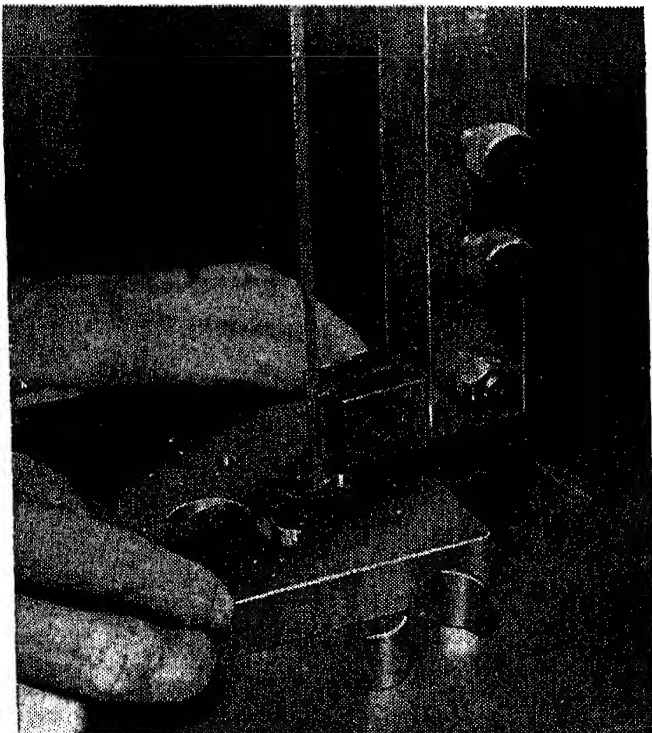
Openings in a die block being sawed on a contour band sawing machine. (Courtesy Grob Bros.)
